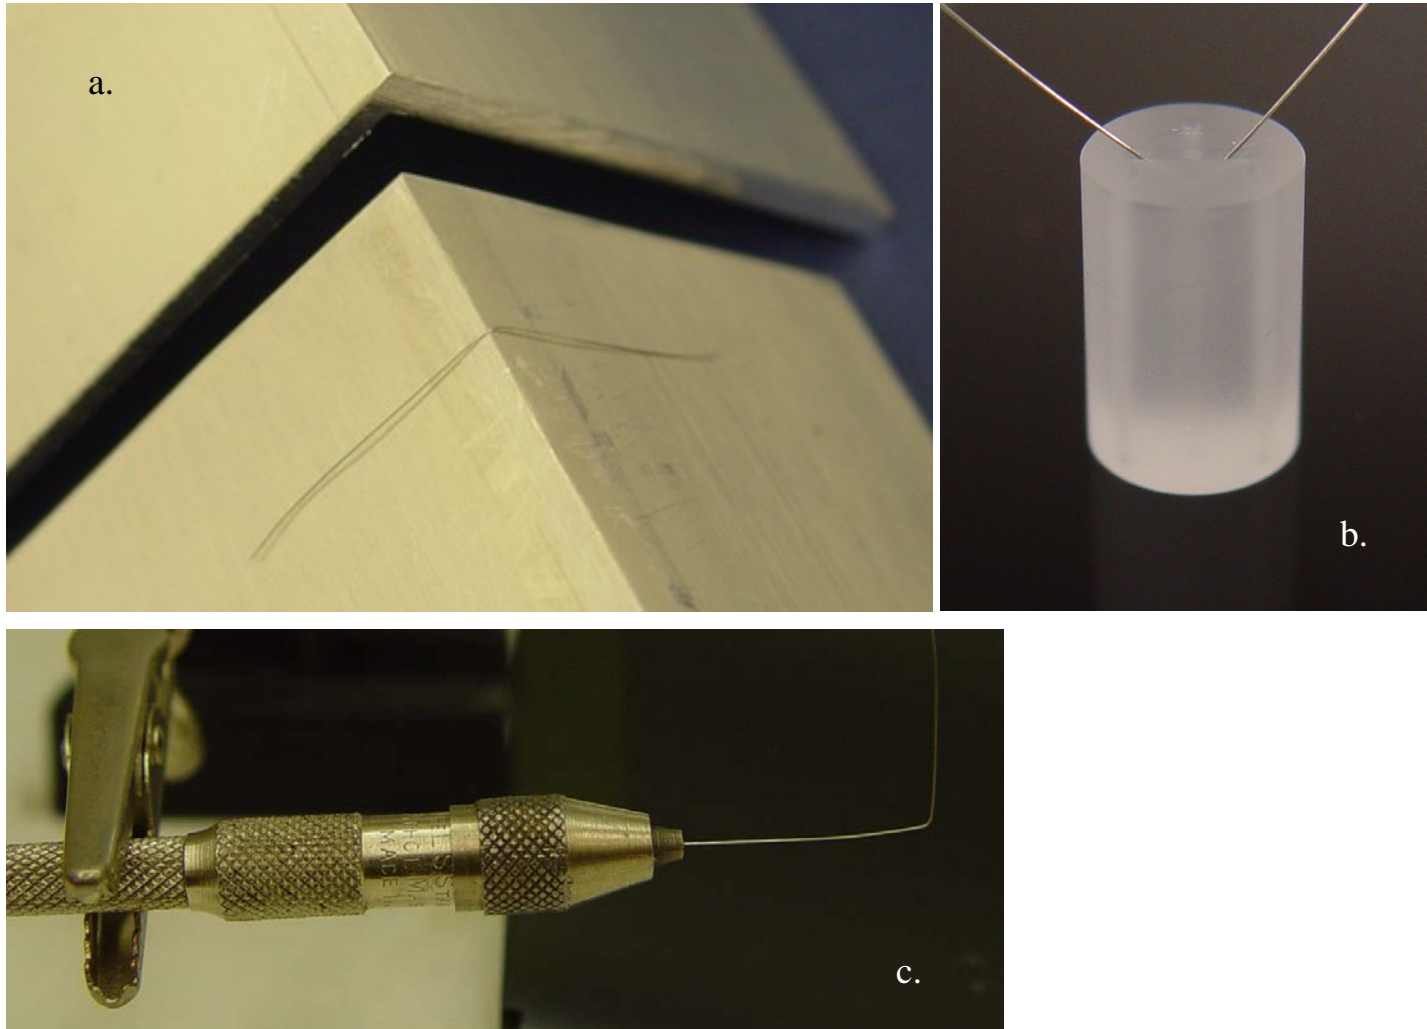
Shaping and sizing an anode spring. a. A piece of NiCr wire is bent at a 30° angle by pressing over an anvil (top left). b. The spring is checked against the V-shaped groove in the rear quartz plug (top right). Note that the spring has not yet been cut to fit within the plug. c. The spring is then anchored to a pencil vice, clamped to a jeweler's stand and positioned horizontally in line with the W-wire spool (bottom; similar to configuration in Fig. 29).
